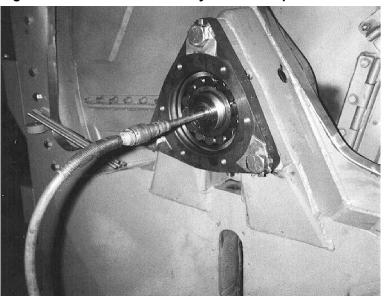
Connection From Hydraulic Pump to Assist in Bearing Removal
